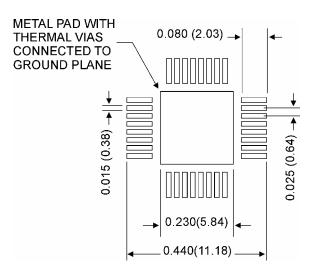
RDA012-QP footprint, dimensions shown in inches (mm).
